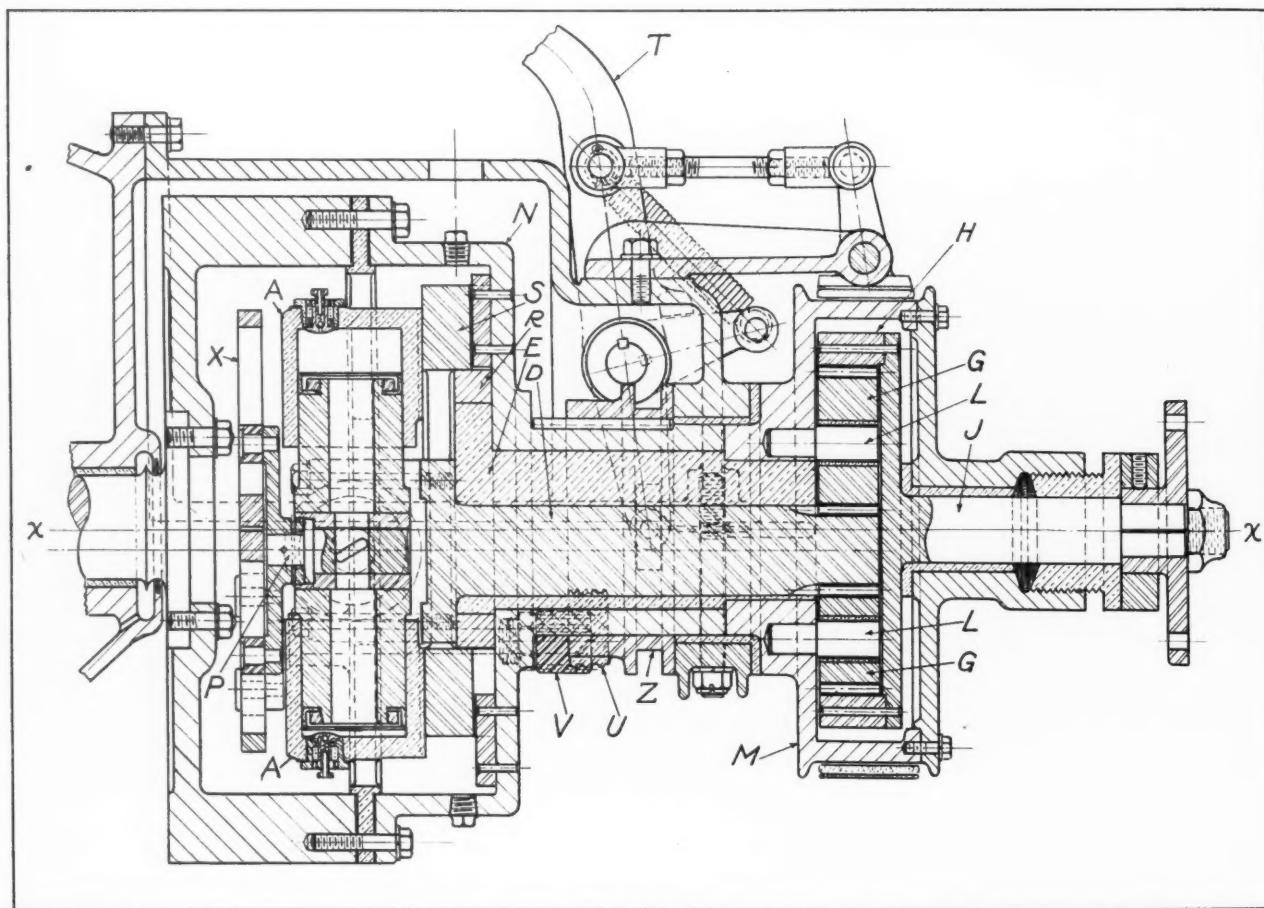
Sectional View of Transmission Shown in Fig. 1, which is Controlled Entirely by a Foot-pedal
